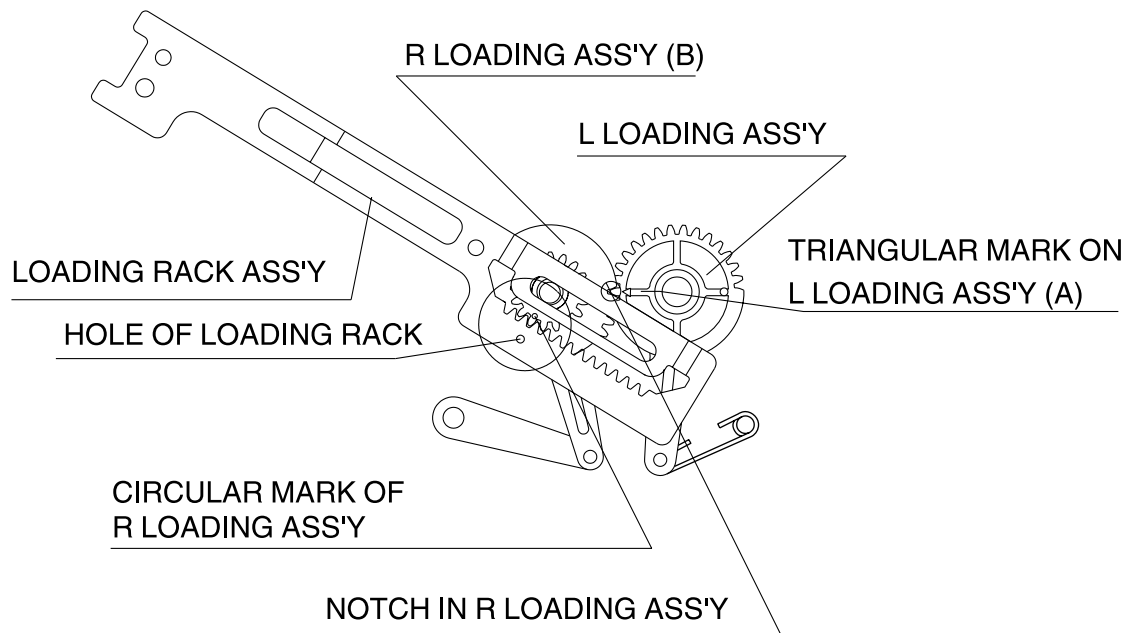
DATUM POSITION OF LOADING RACK ASS'Y & R/L LOADING LEVER ASS'YS
